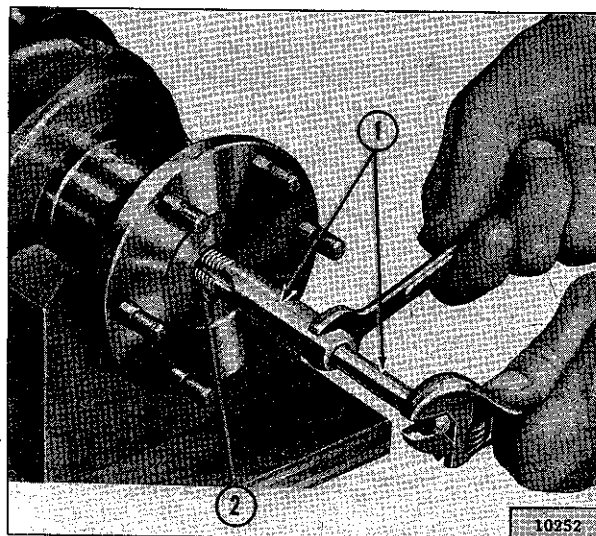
REMOVING CRANKSHAFT PILOT BUSHING—L6-226 MODELS
